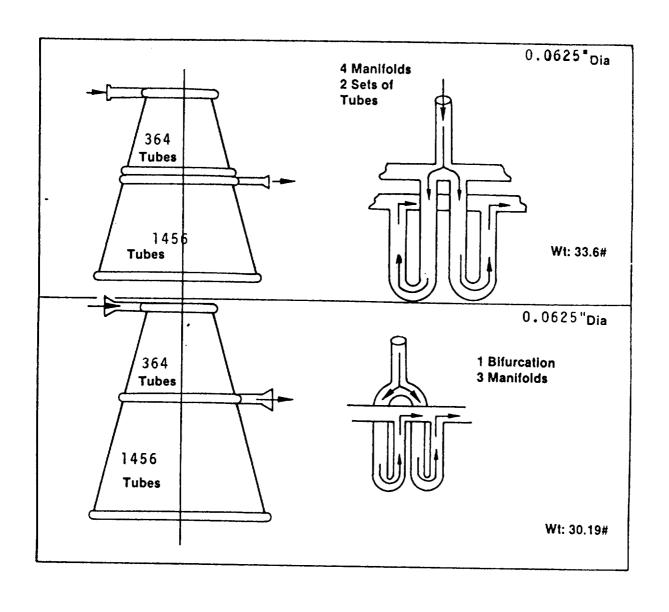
7.5K Design: Ox Cooled Nozzle Extension Concept
